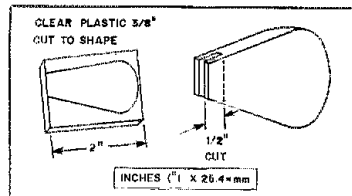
Cut paddle grip from 3/8-in. plastic as shown. Dimensions shown are representational; the precise size and shape should suit the taste of the builder.
